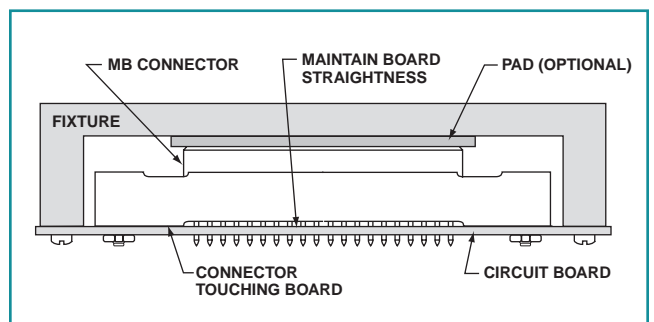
TYPICAL FIXTURE FOR SOLDERING MB CONNECTORS
